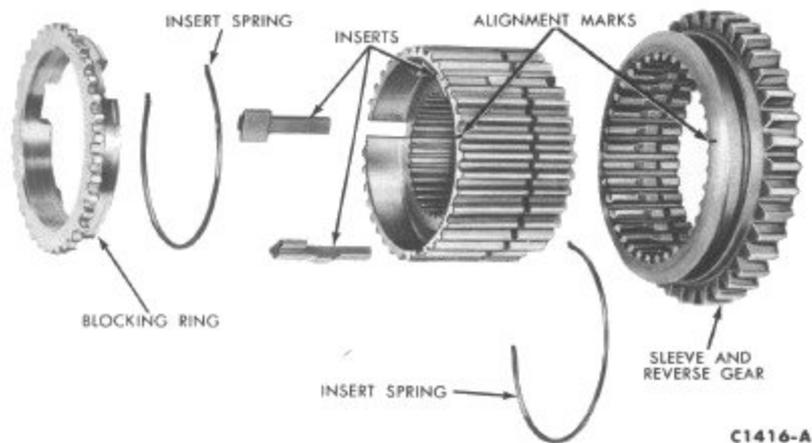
First and Reverse Gear Synchronizer Disassembled
